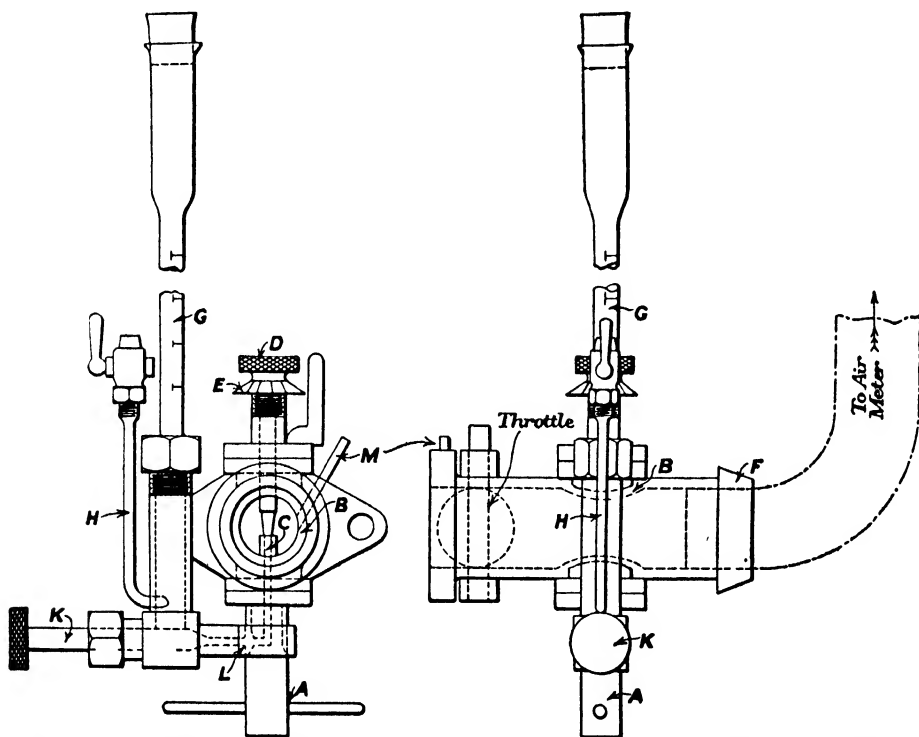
SECTION OF CARBURETTOR USED IN STARTING TESTS BY HOFFERT AND CLAXTON.
